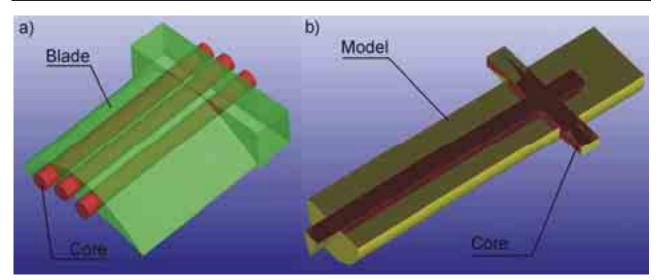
The 3D-CAD prototype of core model: a) blade, b) test cylinder
